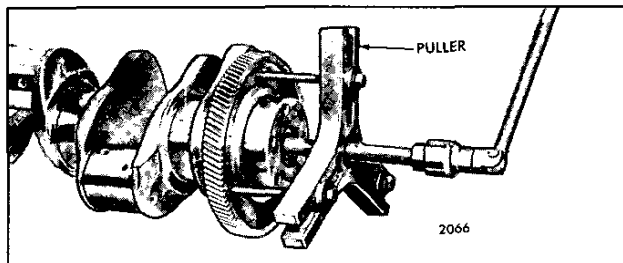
Removing Crankshaft Timing Gear with Puller J 4871
